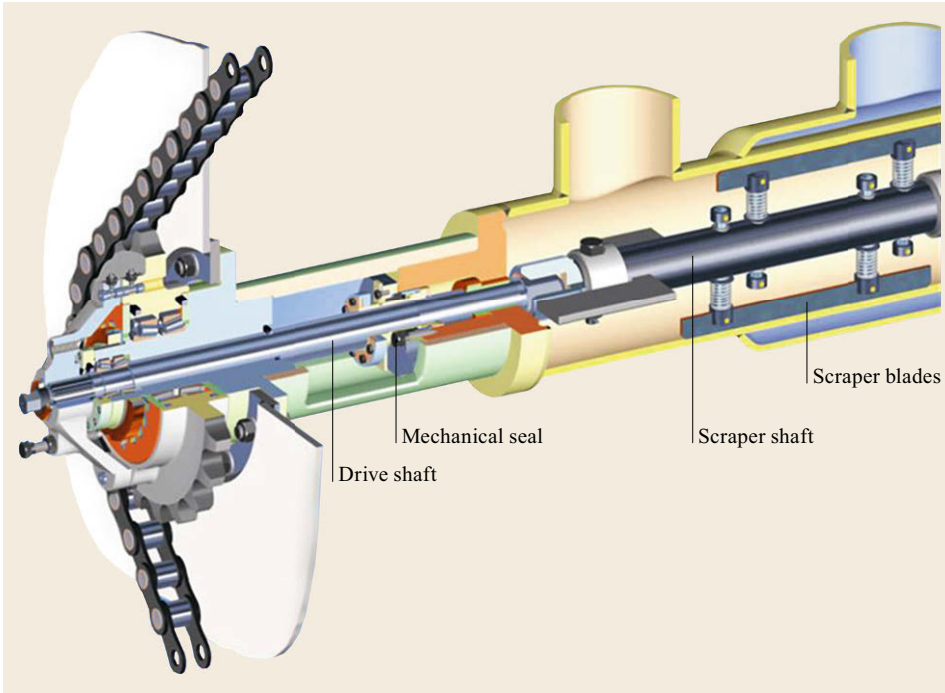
Drive system with scraper shaft of an SSE. (Photo courtesy of BORSIG)
